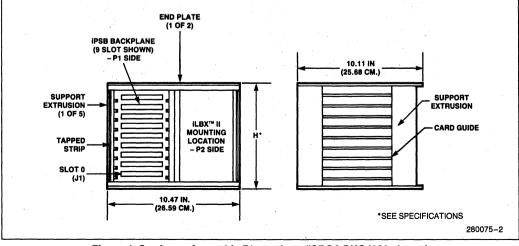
Cardcage Assembly Dimensions (iSBC® PKG/609 shown) 16-2
